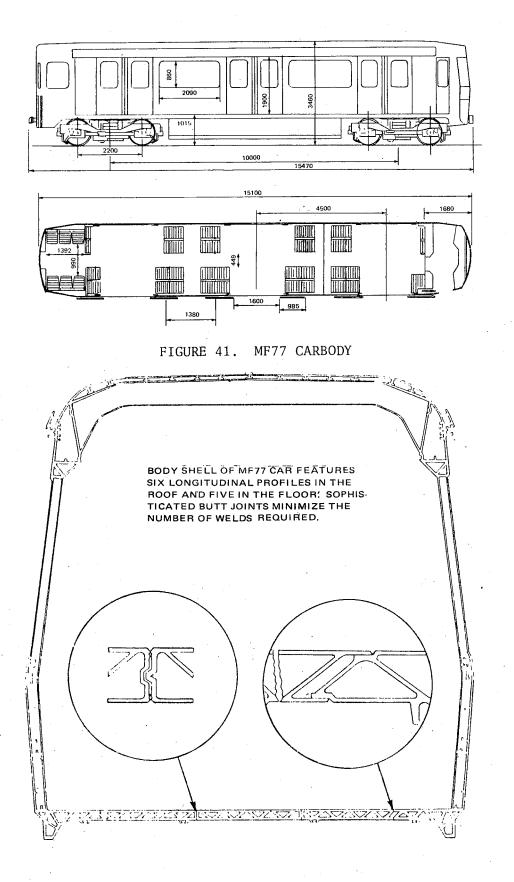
CROSS-SECTIONAL VIEW OF MF77 BODY SHELL
